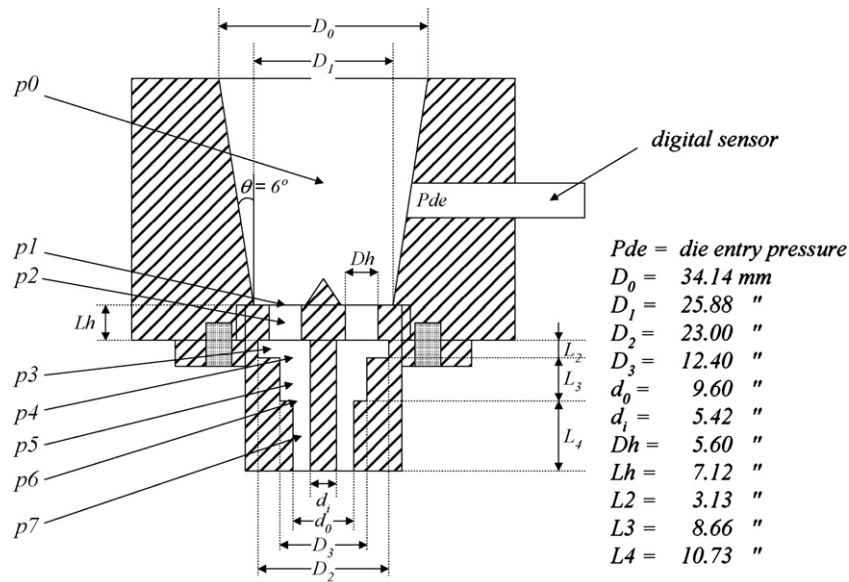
Detailed representation of the die used for ram and screw extrusion of hole-tubes.
